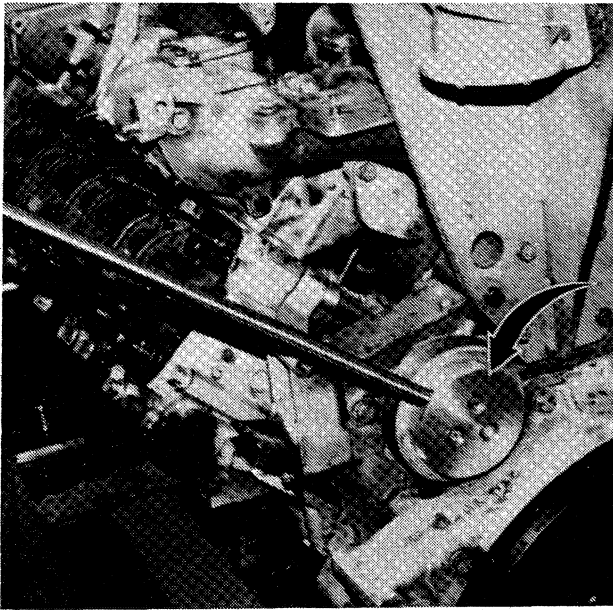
LOCATION OF ACCESSORY T-82271 PULLEY FOR MANUALLY ROTATING CRANKSHAFT
